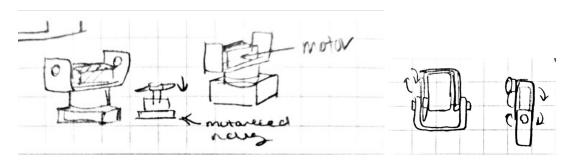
Sketch of internal mechanisms detailing rotation and wiring
